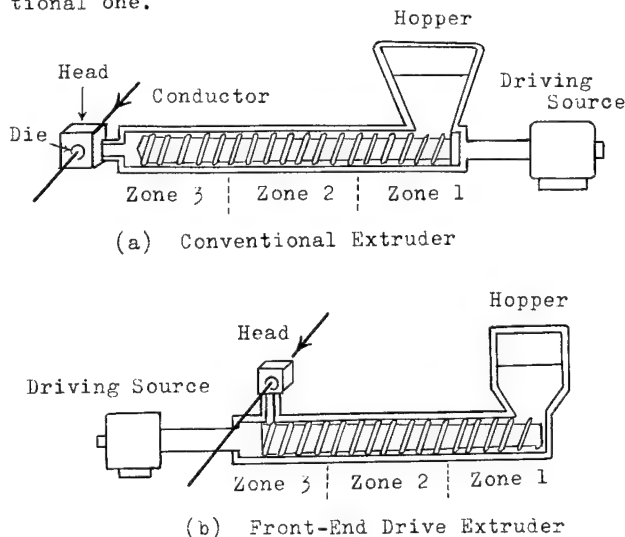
A Conventional Extruder and a Front-End Drive Extruder
